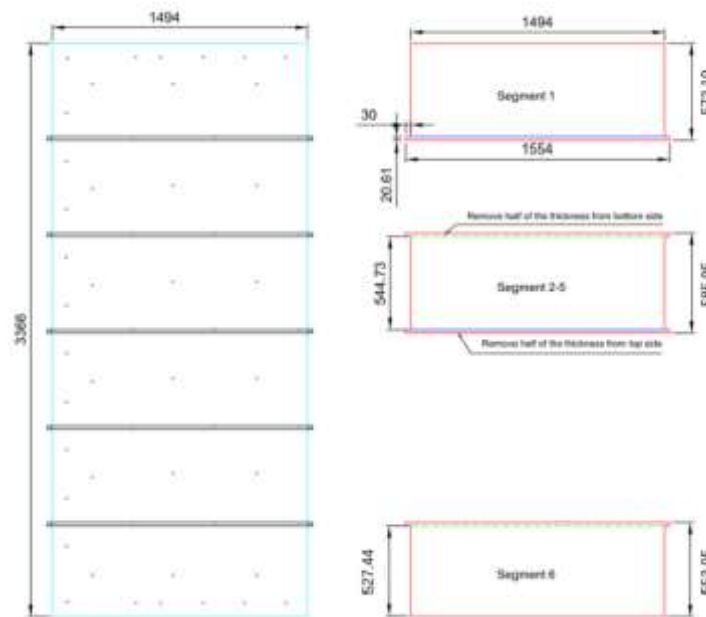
Assembly from sub-panels of a perforated PCB panel corresponding to a CRP half
